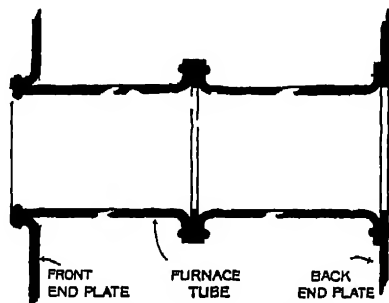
Method of Fitting Furnace Tube to End Plates
